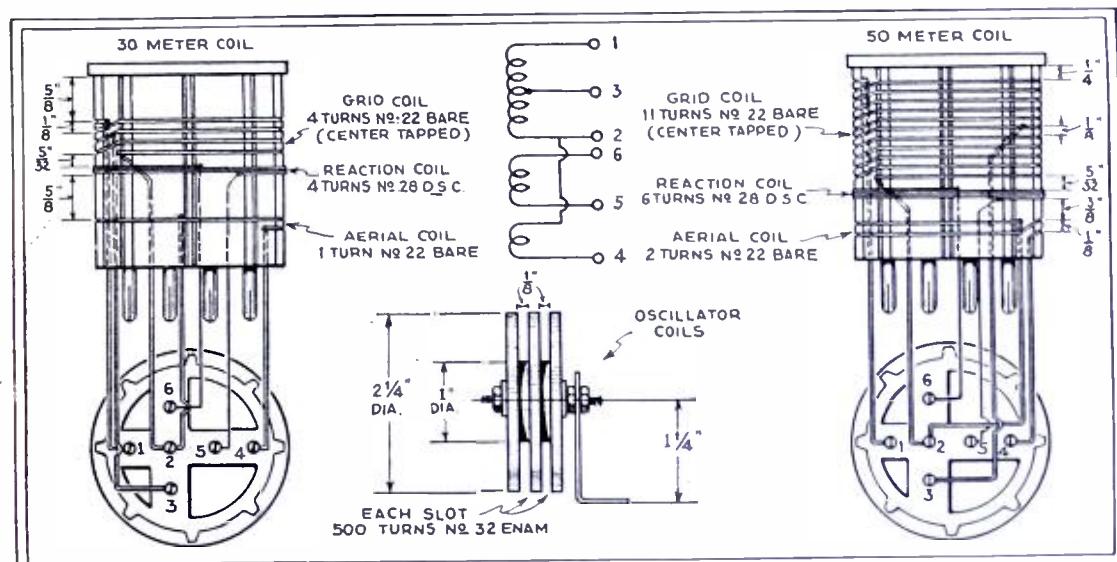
Details of coils and winding data, also dimensions of wooden form for quenching oscillator coils.
